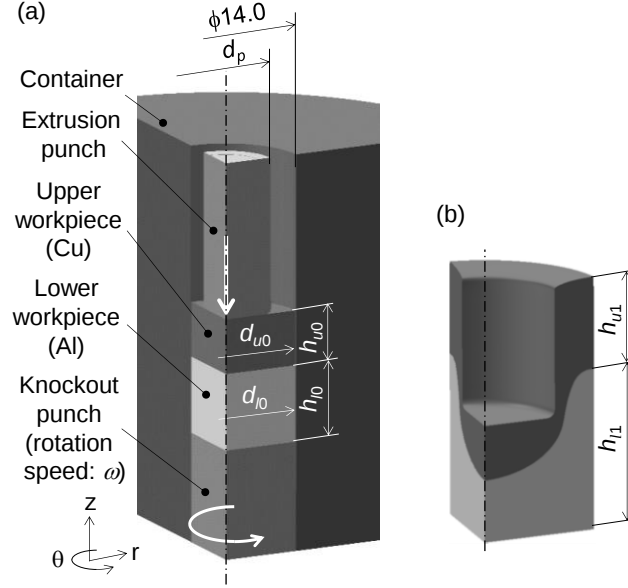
Schematic illustrations (quarter longitudinal section) of (a) layout of dies and workpieces and (b) forged workpieces (forging stroke $s = 5.0$ mm) in backward extrusion forge-bonding with circumferential sliding.
